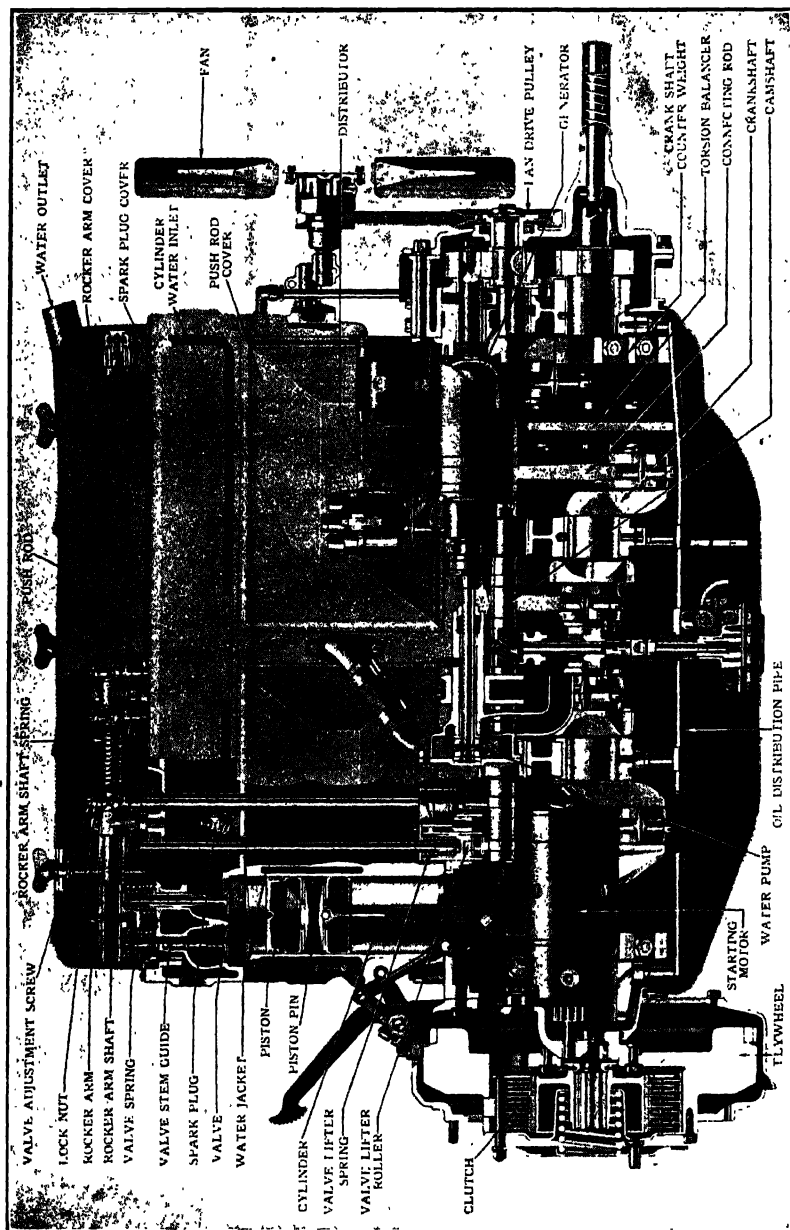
Interior Construction of the Engine. (Buick, 1928.)
